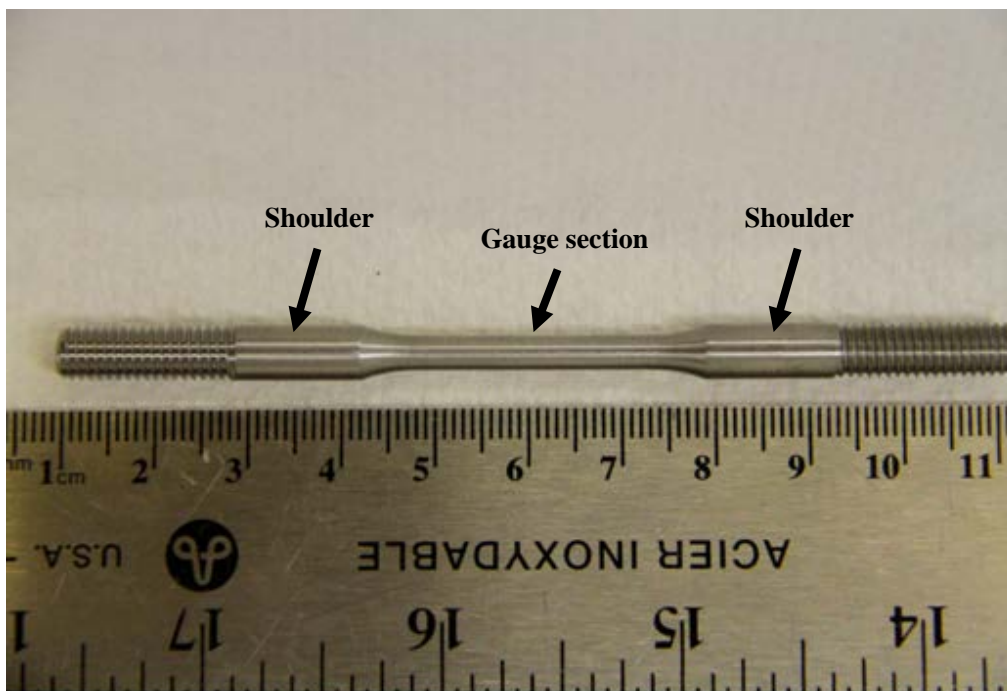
Tensile specimen used in proof ring test and SSRT test.
